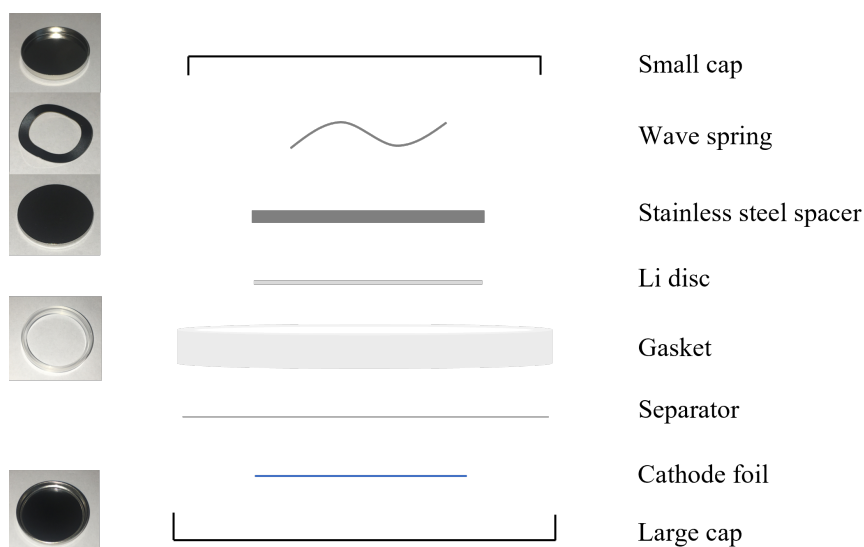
Exploded view of an assembled coin cell with description of the different coin cell parts. Pictures are included of metal parts and the gasket.
